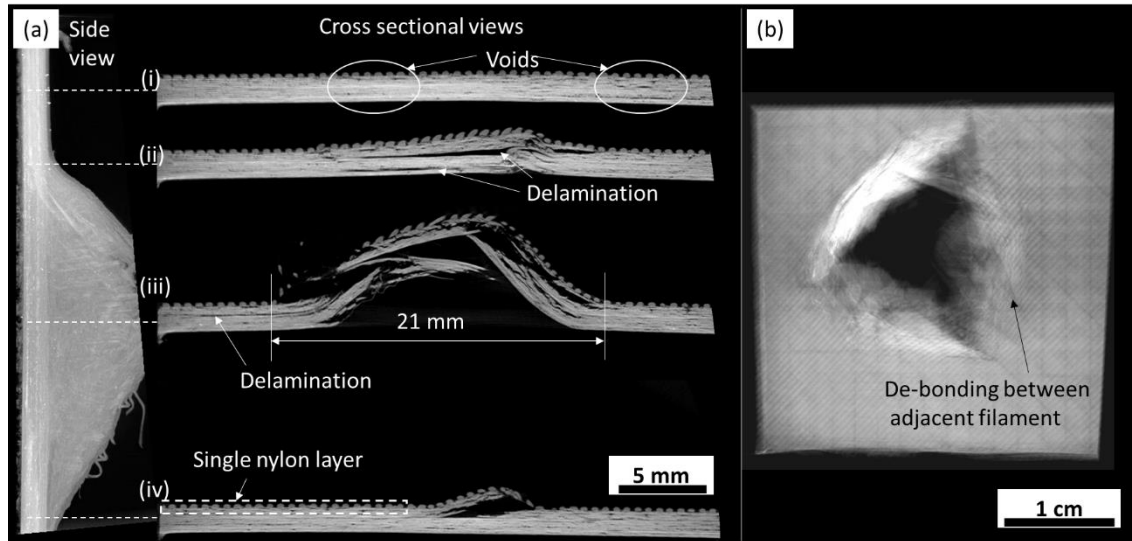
(a) CT-scan image of the side view and cross-sectional views of the fractured area of carbon fiber specimen (b) 3D view of the μ CT-scan image of the fractured area of carbon fiber specimen
